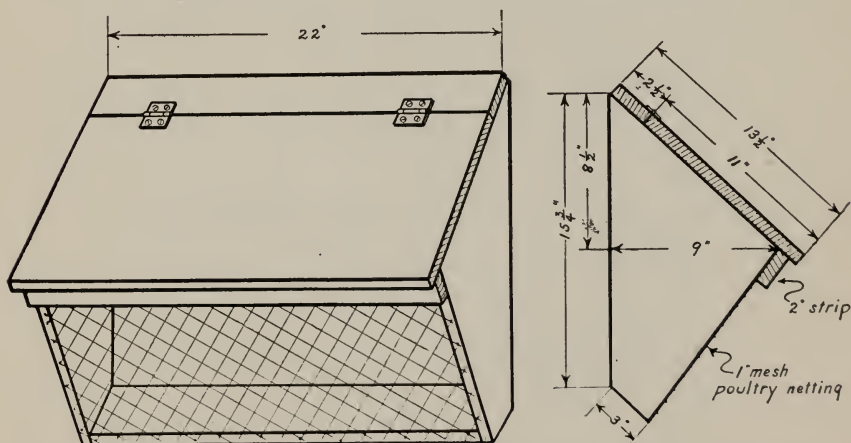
Plans for the construction of the wall type of green feed hopper.
